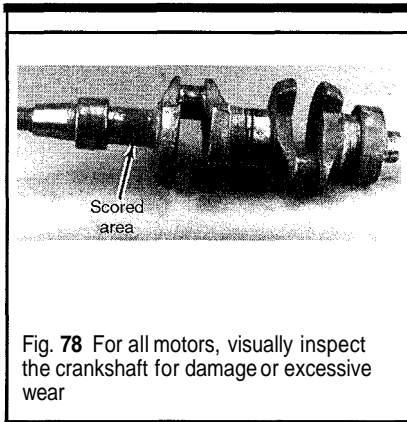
For all motors, visually inspect the crankshaft for damage or excessive wear
